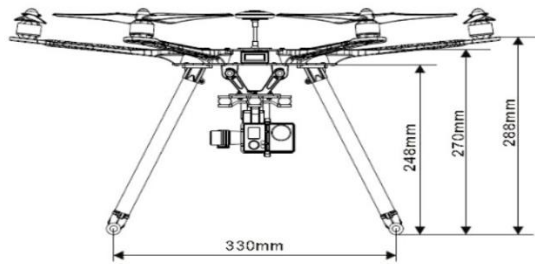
Thunder S550 Hexacopter Frame Kit W/ PCB
